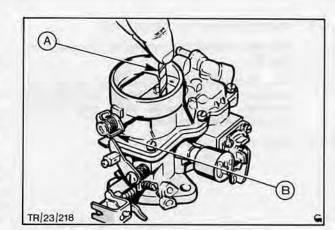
Choke mechanism held in closed position to check choke plate pull down A - Specified twist drill B - Adjusting tag
